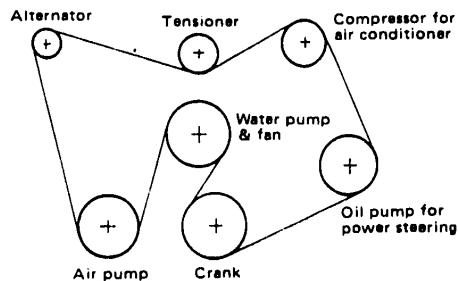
Layout Using Polyvinyl (Serpentine), Ford Mustang
